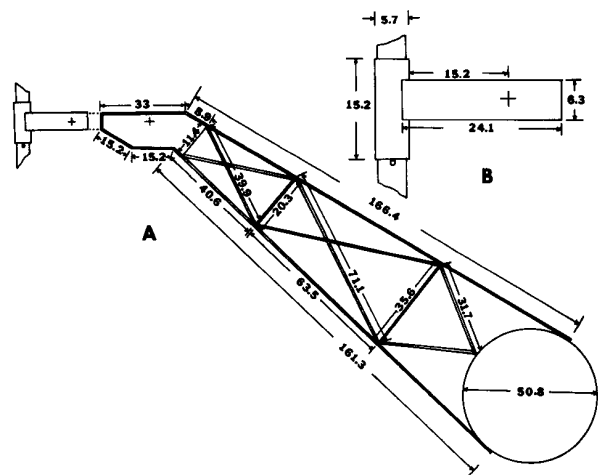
Surface sampler frame and hinge: (A) sampler showing position of hinge; (B) side view of hinge mounted on crossbar. Measurements are in centimeters.
